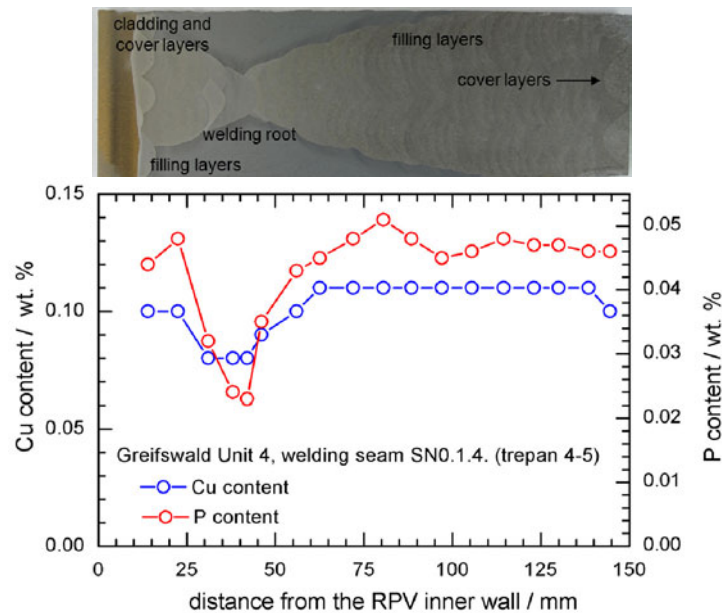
Metallographic section and P and Cu content through the thickness and of trepan 4-5 extracted from the beltline welding seam SN0.1.4. of the Greifswald Unit 4 RPV [9]
